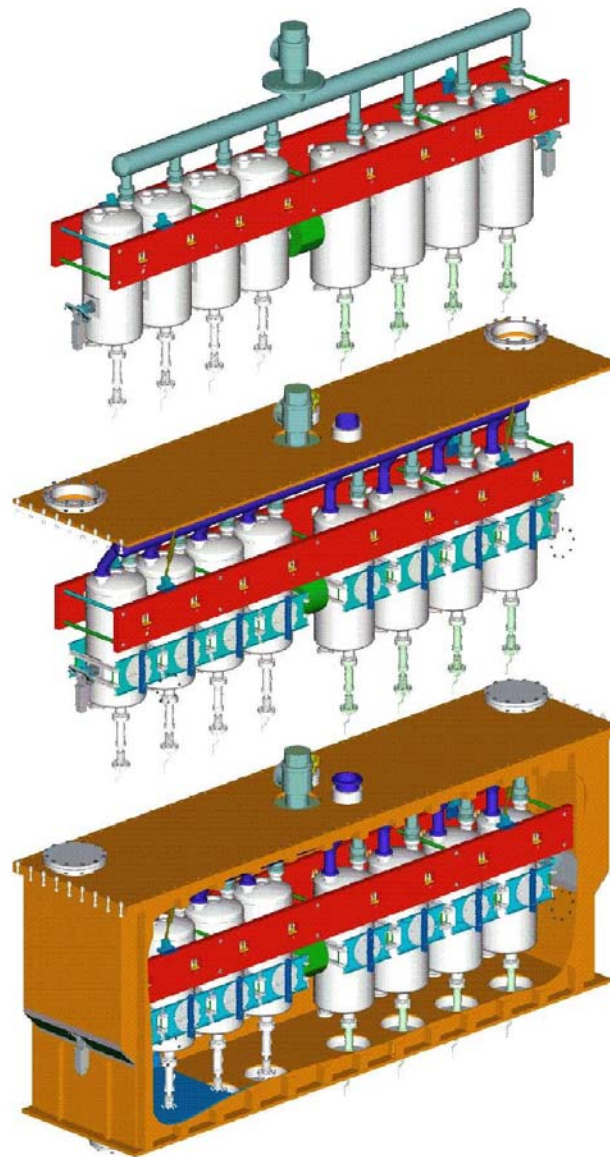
Cryomodule assembly sequence. (Top) clean-room assembly of cavity string includes cavity and beam line vacuum and couplers. (Middle) Top flange assembly includes cryogenic systems. (Bottom) Completed cryomodule.
